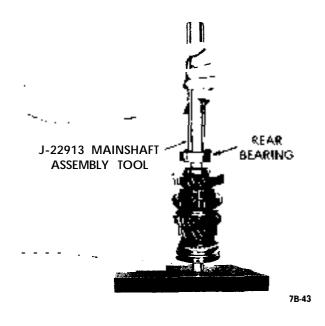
B-43 Pressing on Rear Bearing Using Tool J-22913
